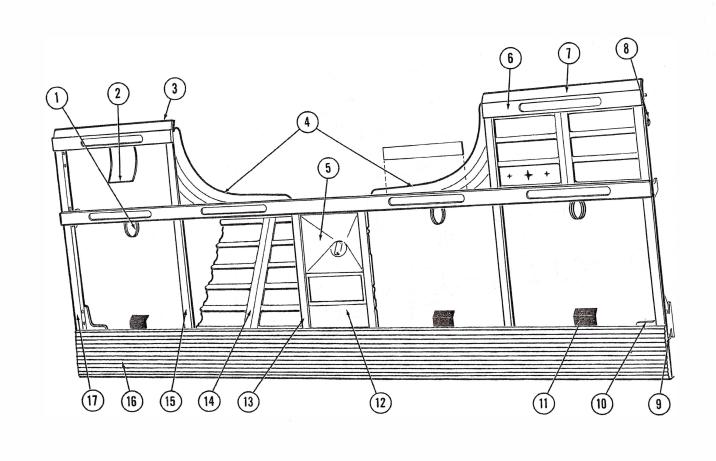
PROGRAM HOLDER ASSEMBLY, 2404-2404S
